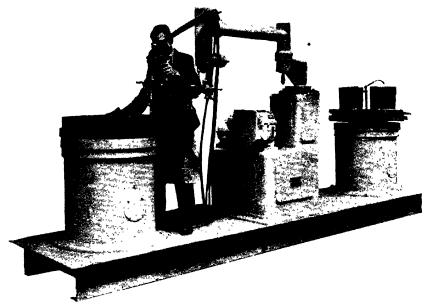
A TWIN-TABLE FLAME-CUTTING MACHINE FOR REMOVING RUNNERS AND HEADS FROM SMALLER STEEL CASTINGS
